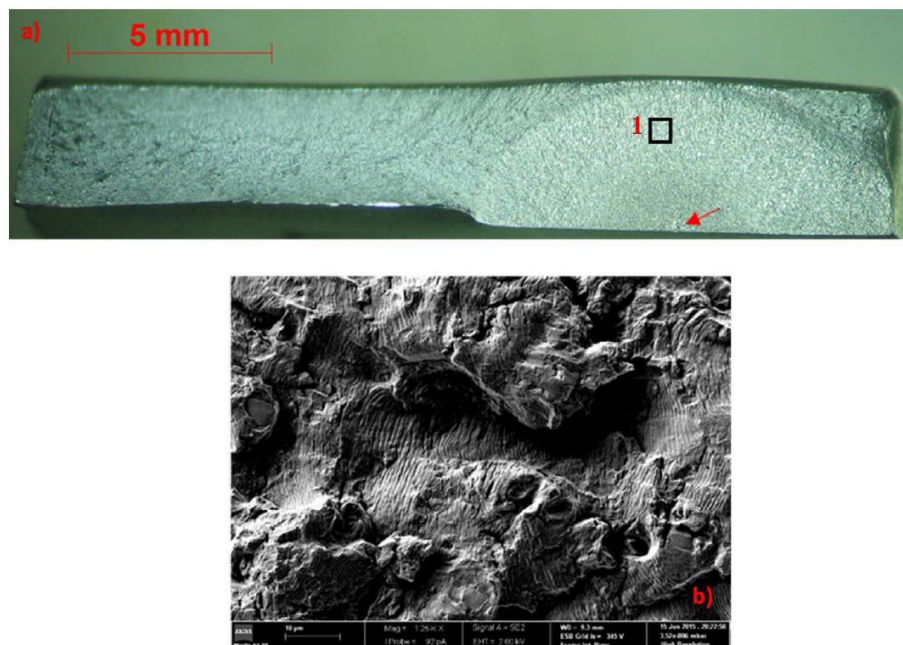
Fracture surface of a BPP5-1 fatigue specimen ( $\Delta\sigma = 160$  MPa): a) Macrograph of the specimen; b) Fractography of fatigue zone 1.
